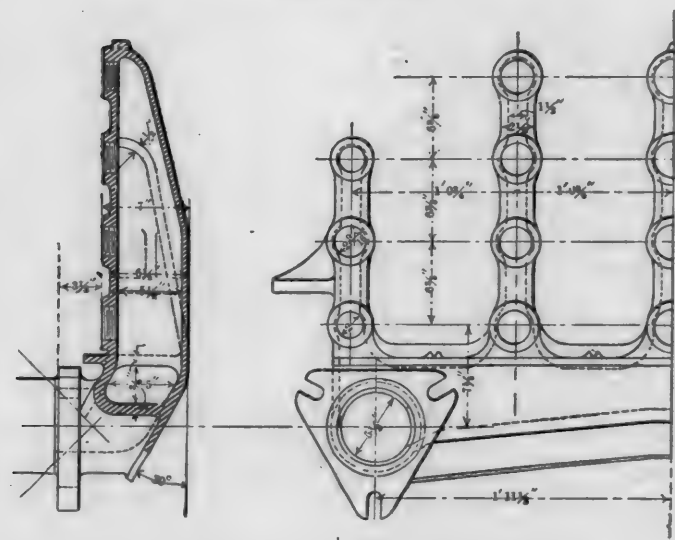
BOTTOM OR SUPERHEATED STEAM HEADER.
